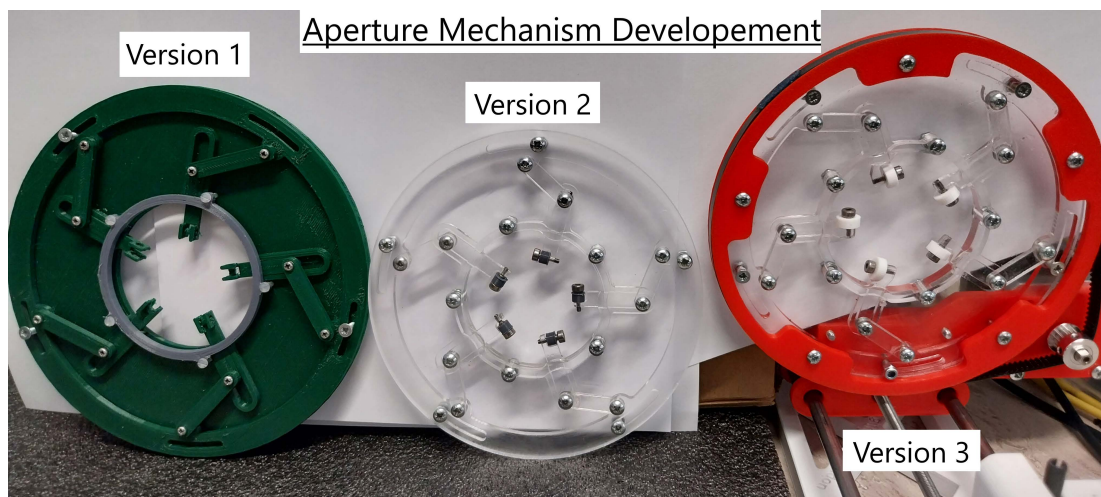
The physical prototyping done on the aperture mechanism, starting with a basic proof-of-concept in version 1 to the final prototype in version 3.
